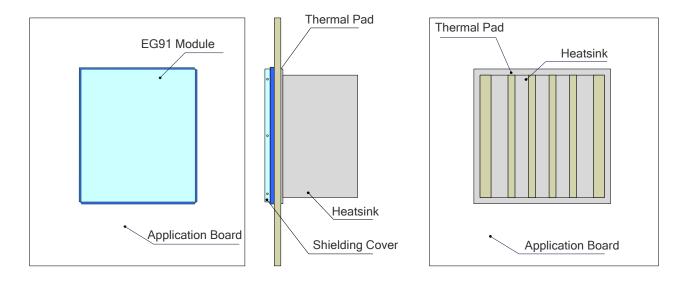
Referenced Heatsink Design (Heatsink at the Backsideof Customers' PCB)
